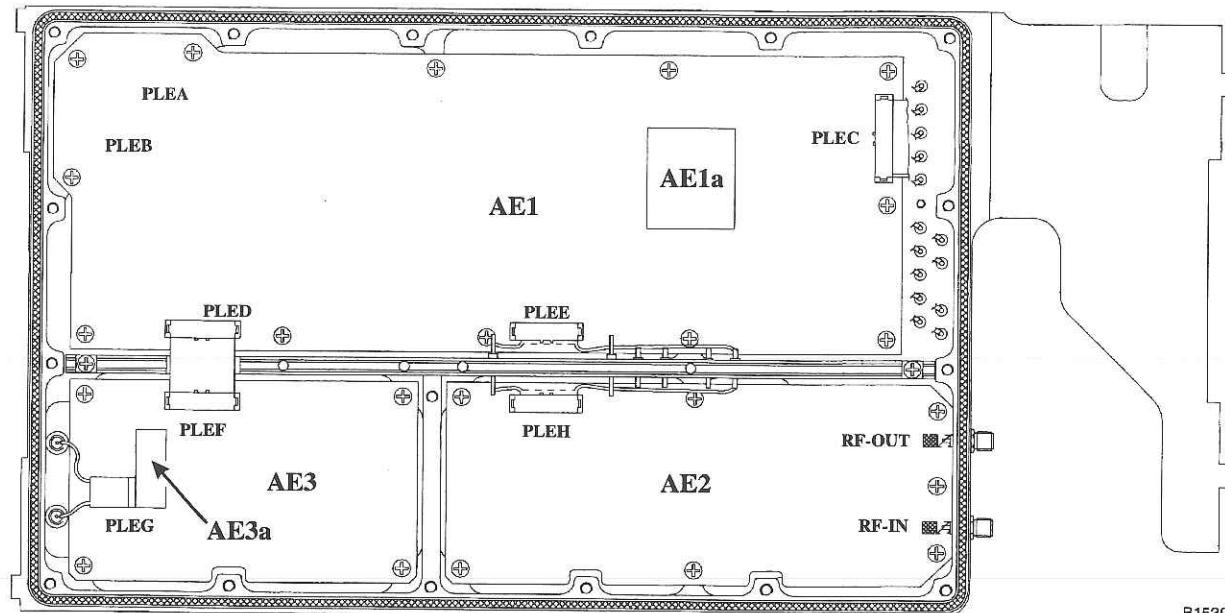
GMSK tray from below with tray cover removed showing boards and locations of connectors
